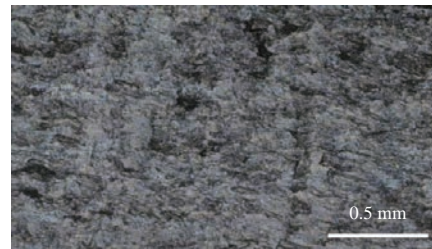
Workpiece surface after forming with T1 wet ($v_f = 500$ mm/min).
